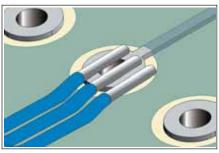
Not Recommended Multiple wires soldered to pad overhanging pad edge.
